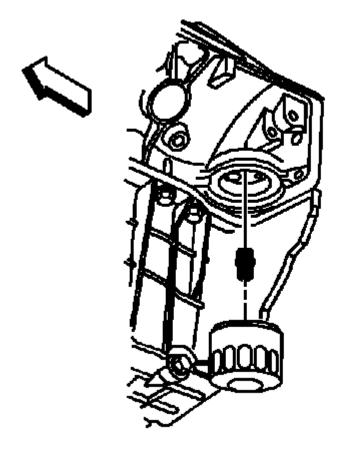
View Of Oil Filter & Adapter Courtesy of GENERAL MOTORS CORP.
